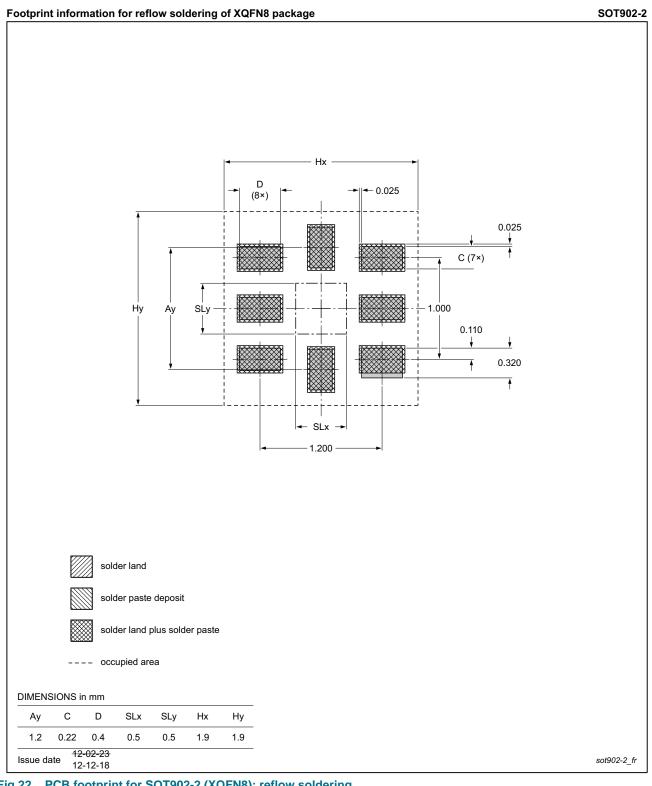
PCB footprint for SOT902-2 (XQFN8); reflow soldering
